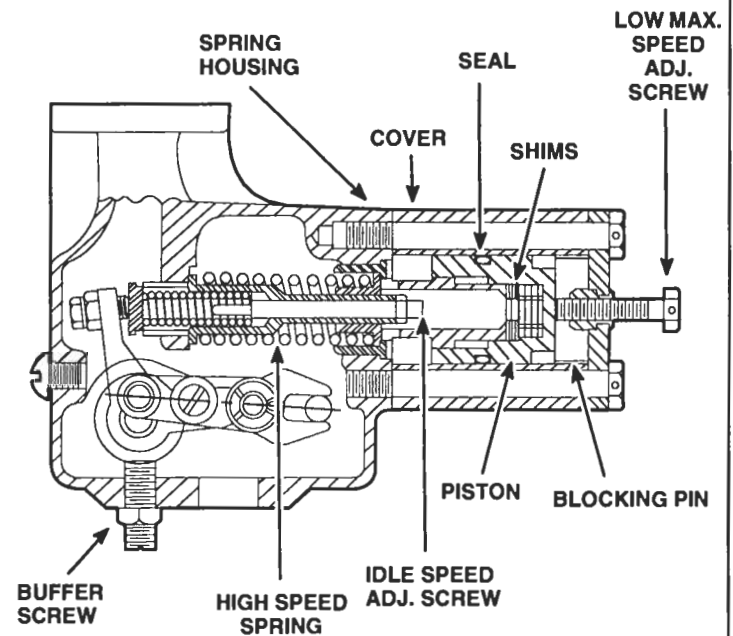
Spring and Piston Assembly of Current Dual Range Governor
